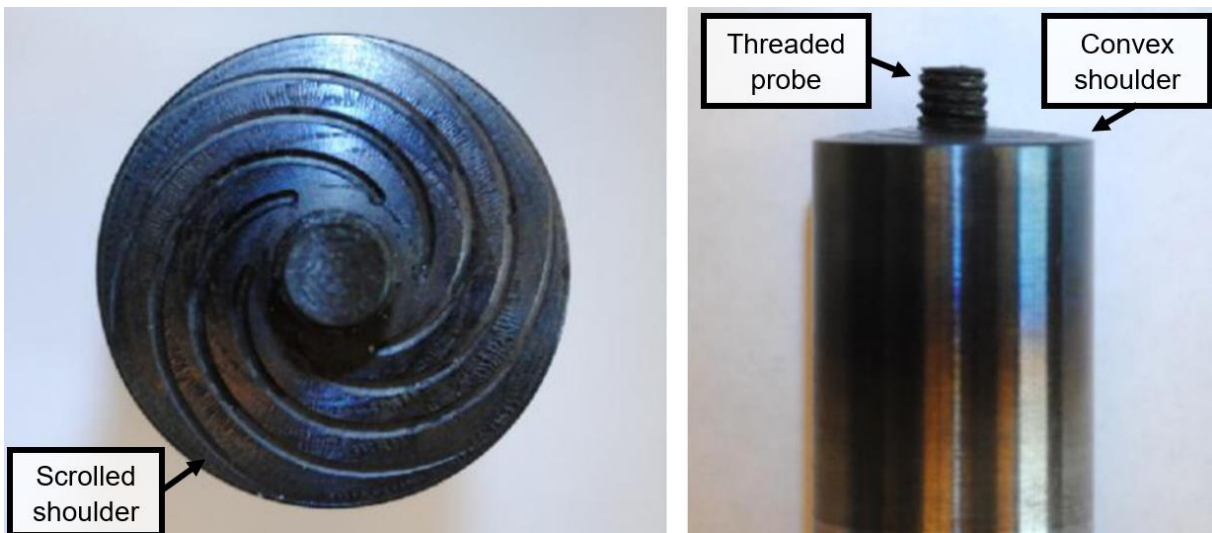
Typical FSW tool with a scrolled, convex shoulder and a threaded probe.
